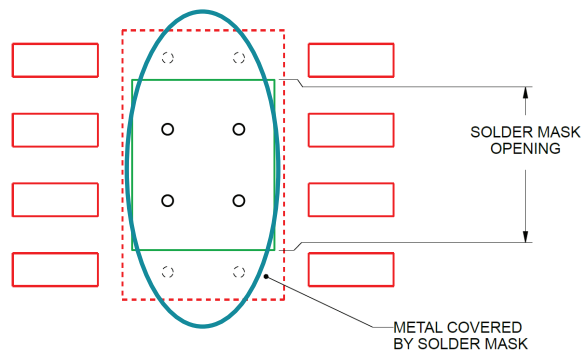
Example thermal pad package PCB footprint with a recommended via pattern.
